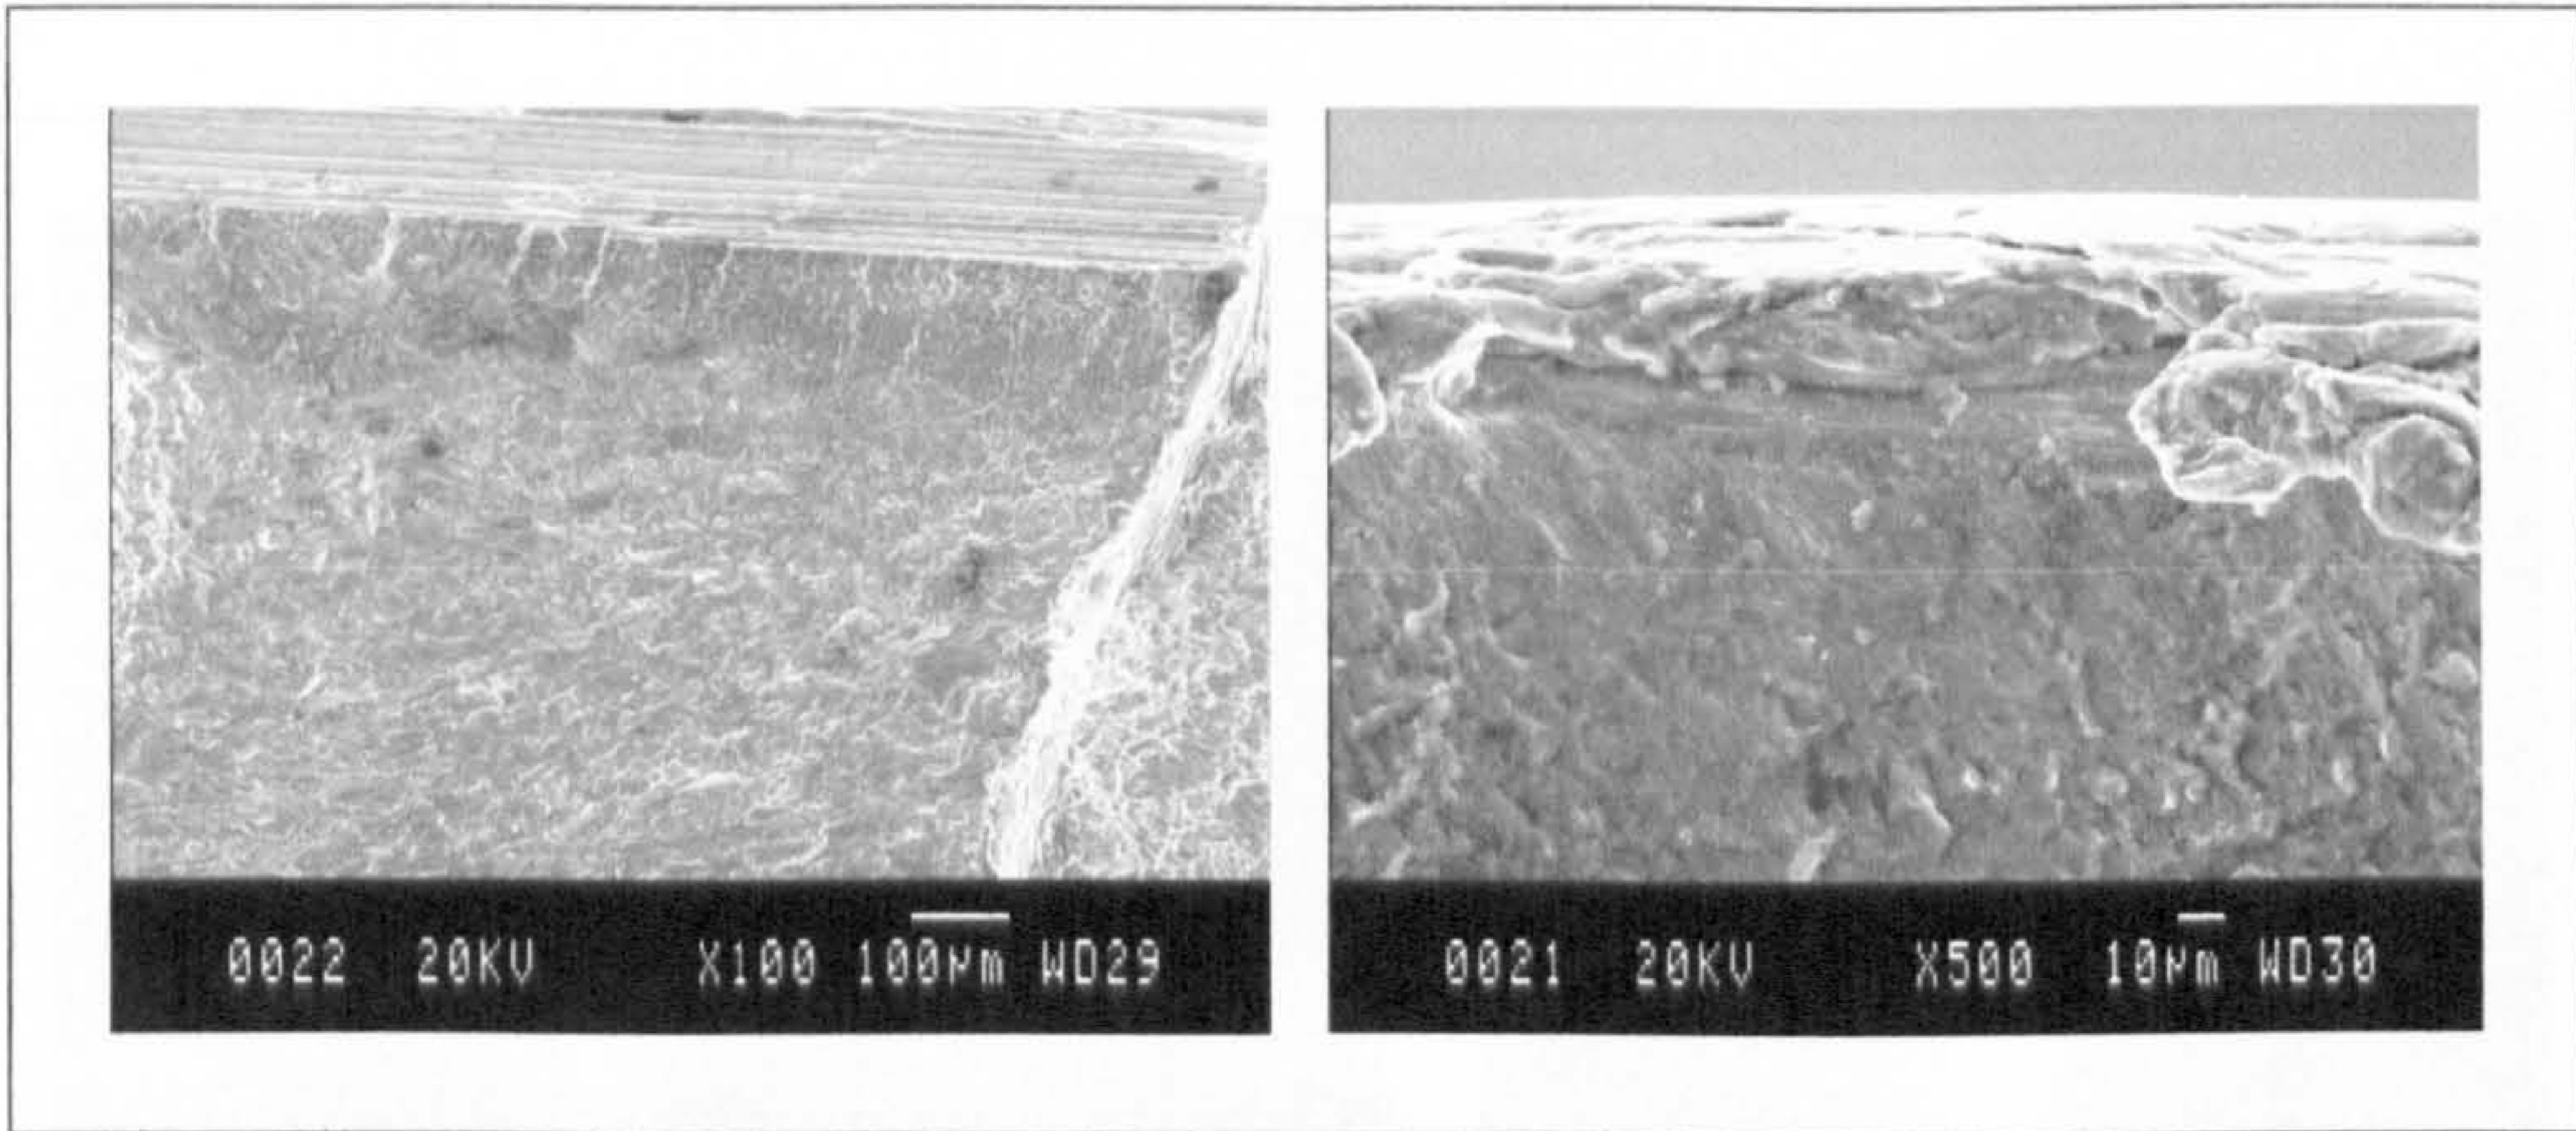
Multiple initiation sites due to scored surface from tool shoulder (left), possible initiation sites from weld flash (right), (FS DP 4).
